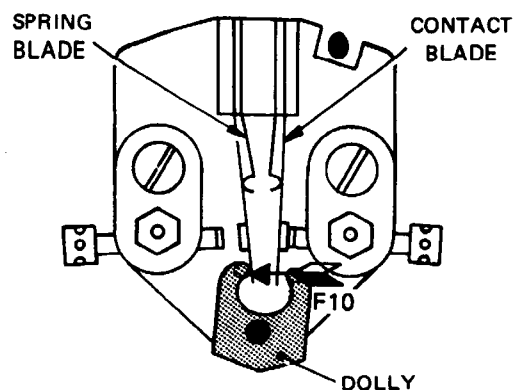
MARK/SPACE CONTACT BLOCK
